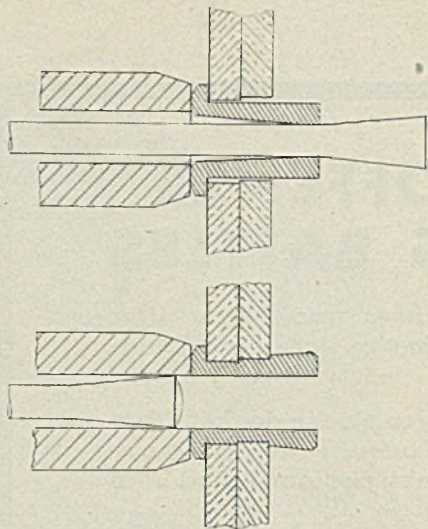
Upper drawing shows mandrel and jaw chucks of riveting gun as well as the rivet with its tapered inner hole. Lower drawing shows what happens to the rivet when the jaw chucks force it off end of mandrel. Rivet hole left is extremely uniform in size, can be plugged easily to make waterproof connection where wanted
